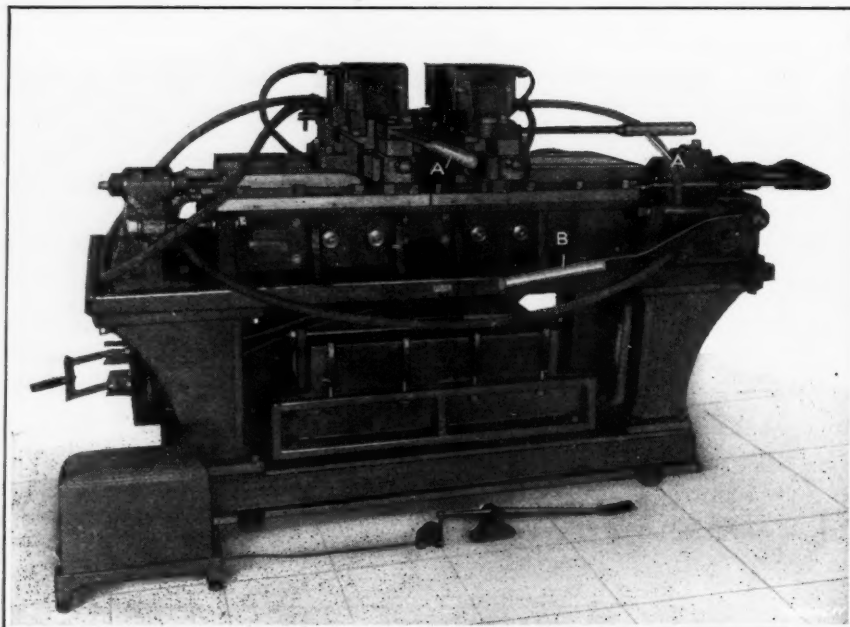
60-kilowatt Thomson Electric Welding Machine particularly adapted to the welding of Pipe and Tubing
